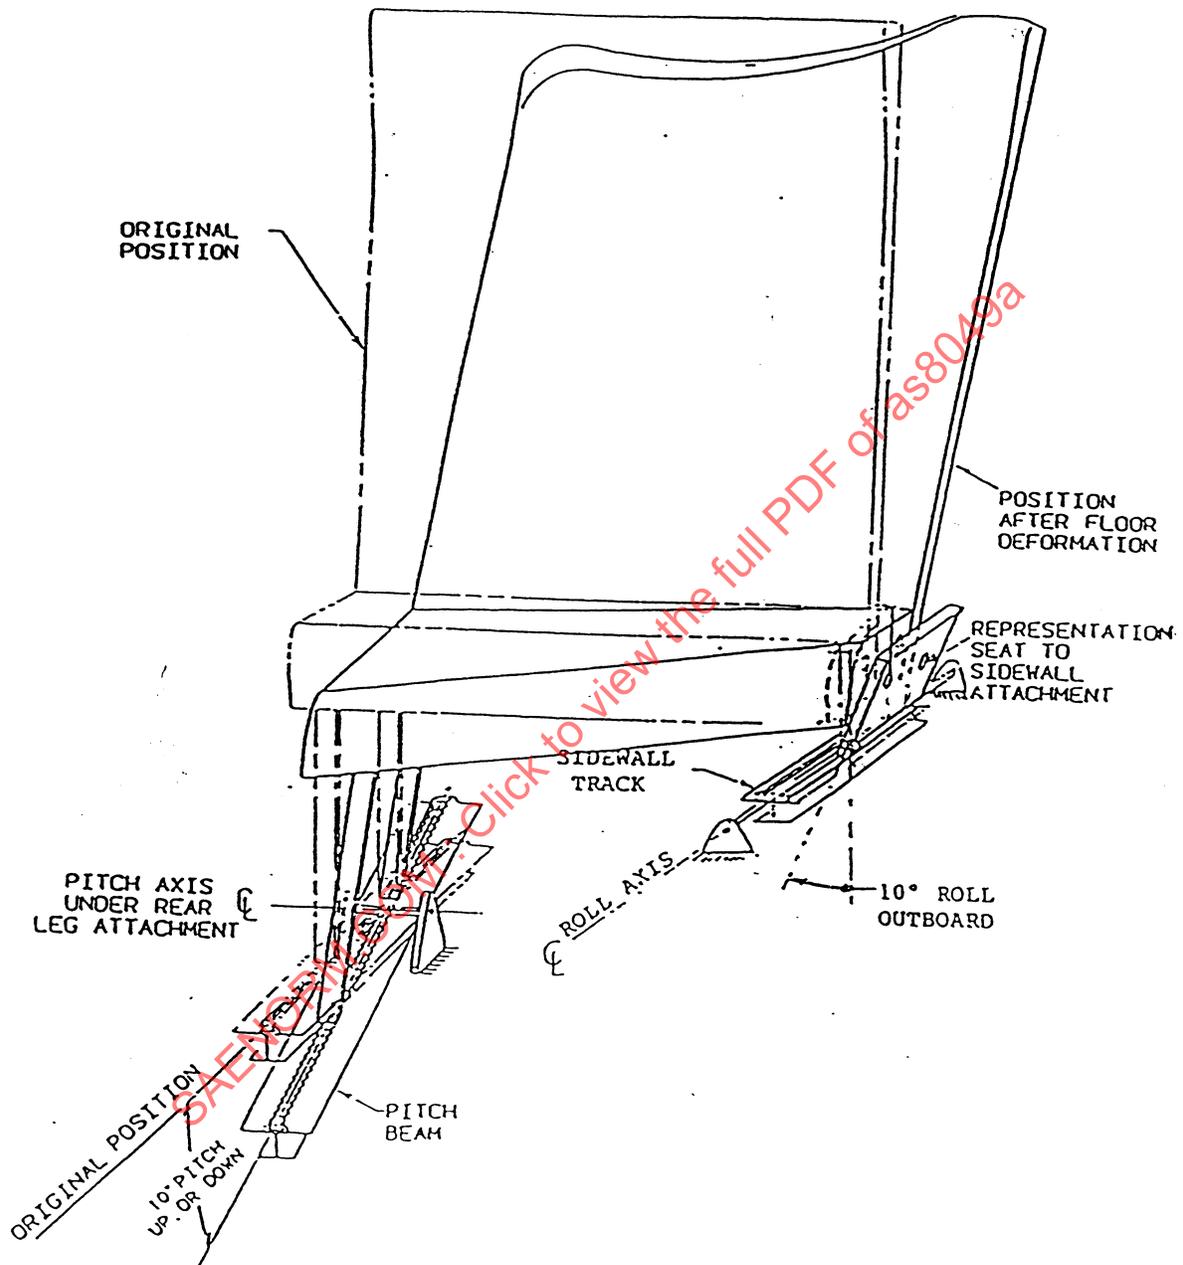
D - Schematic Test Fixture; Side Wall Mounted Seat
